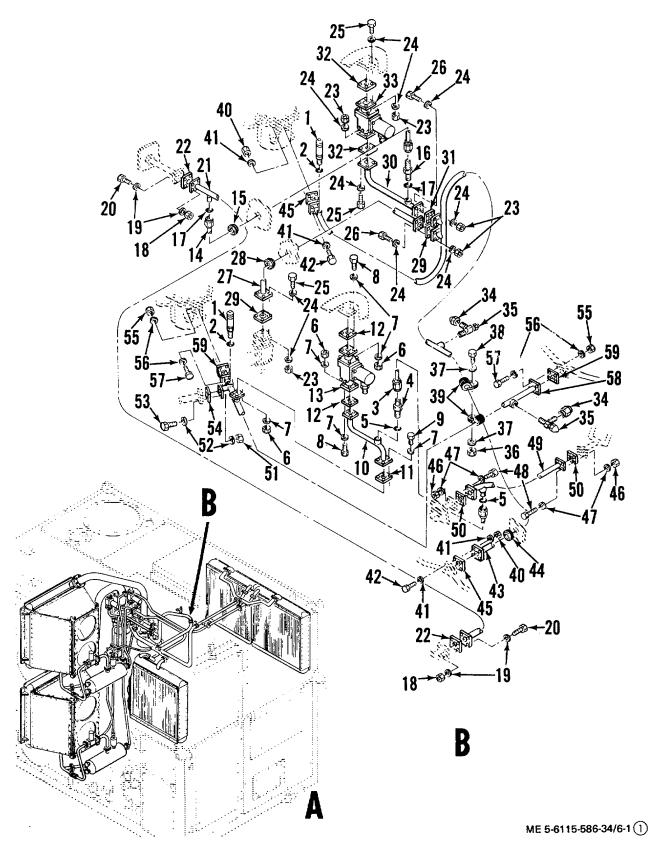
Conditioned air cooling system, exploded view. (sheet 1 of 6)
